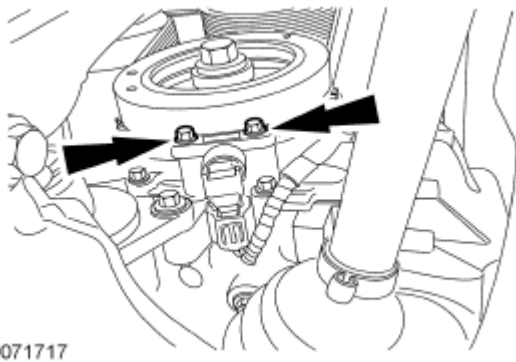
Locating CKP Sensor Bolts (1 Of 2)
